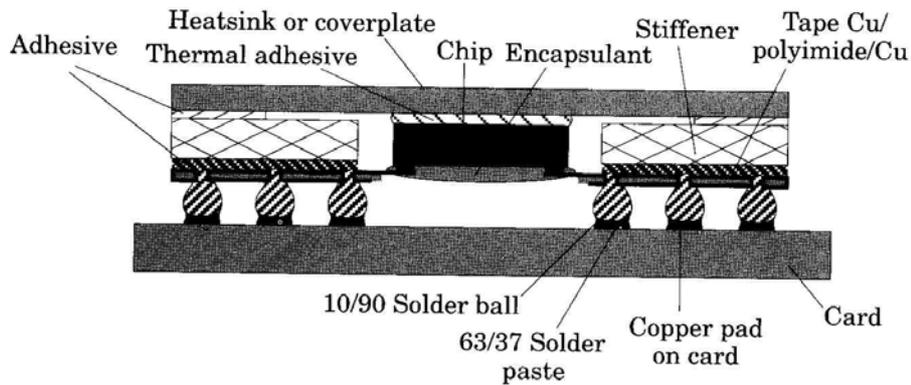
Cross-section of a Tape (or TAB) BGA – TBGA
